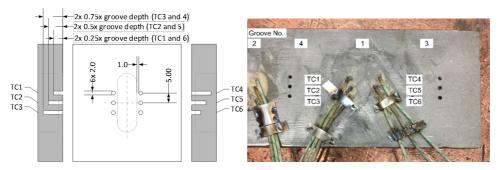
Dimensions and positions of holes for thermocouple placement (left), groove (backside) with attached thermocouples (right).
